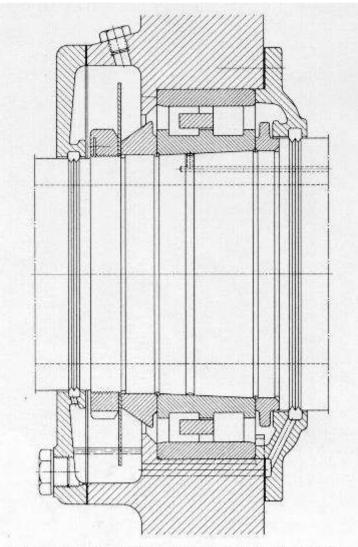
Spindle bearing arrangement having oil bath lubrication
